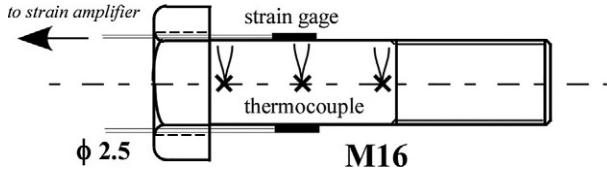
Test specimen of M16 bolt for cooled fitting experiment.
